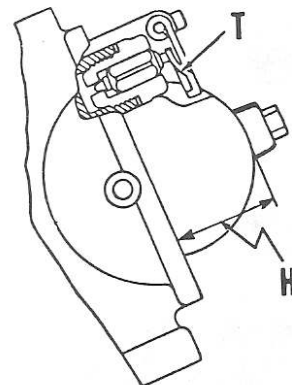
Tilt carburetor when measuring float height so tang (T) just touches inlet valve and valve spring is not compressed. Float height (H) should be 21 mm (0.83 in.). Bend tang (T) to adjust float height.
